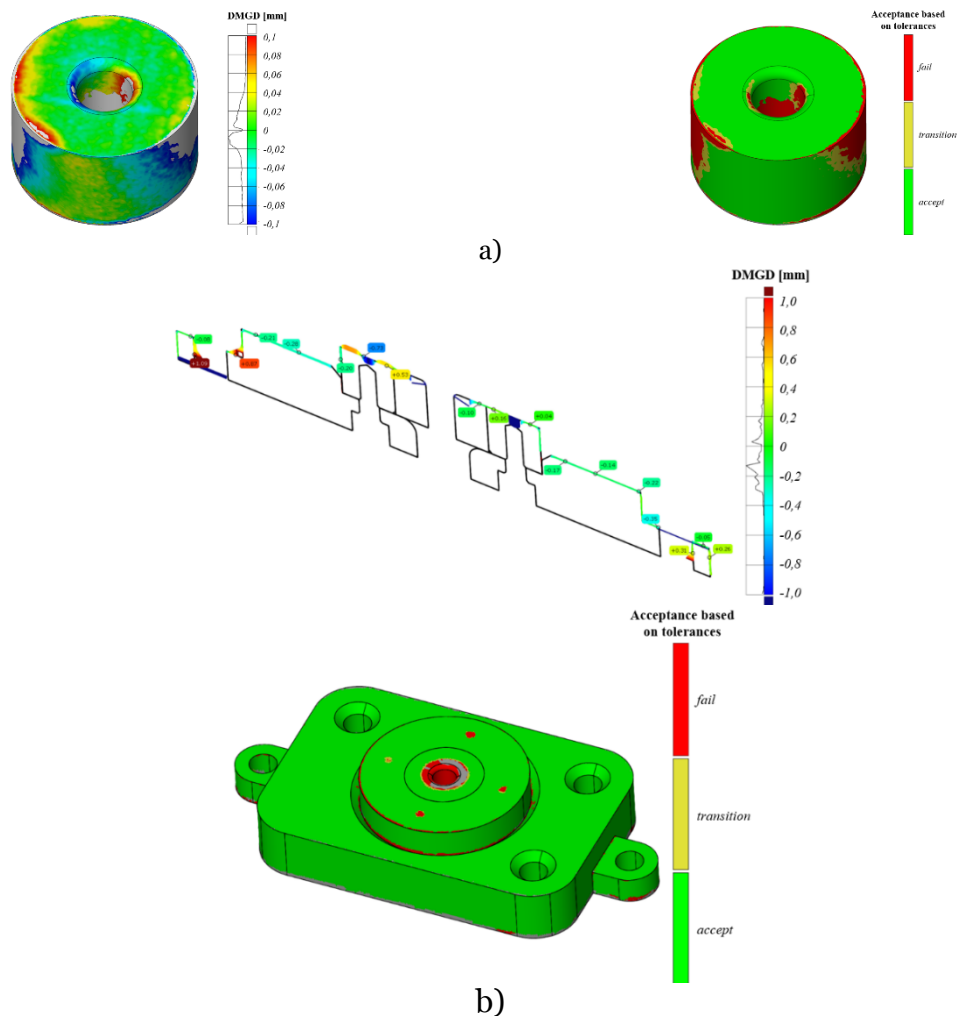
Dimension and tolerance visualization for printed tools' parts: die insert (a) and subassembly of the lower tools' part (b)
